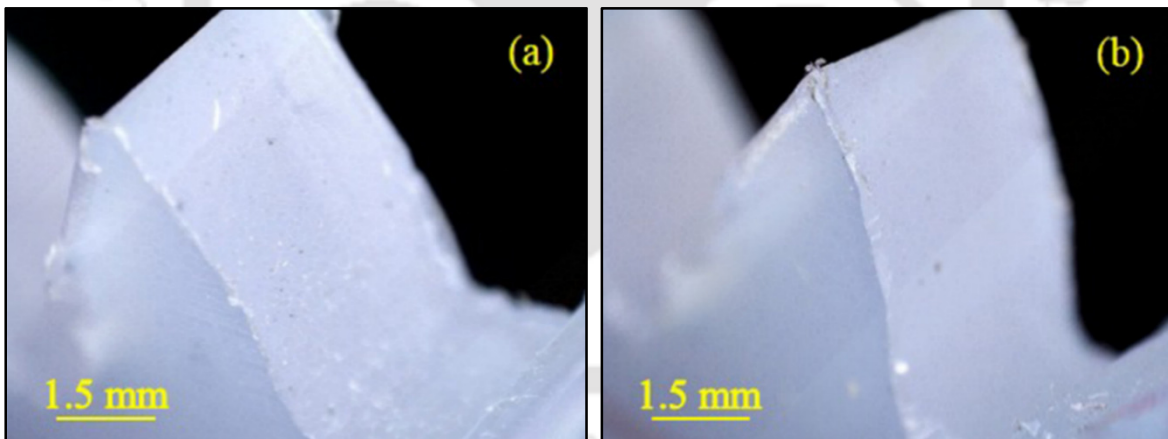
Coast side gear tooth surface of (a) symmetric gear after 2.88×10^5 cycles and (b) asymmetric gear after 1.45×10^5 cycles, 2.5 Nm
